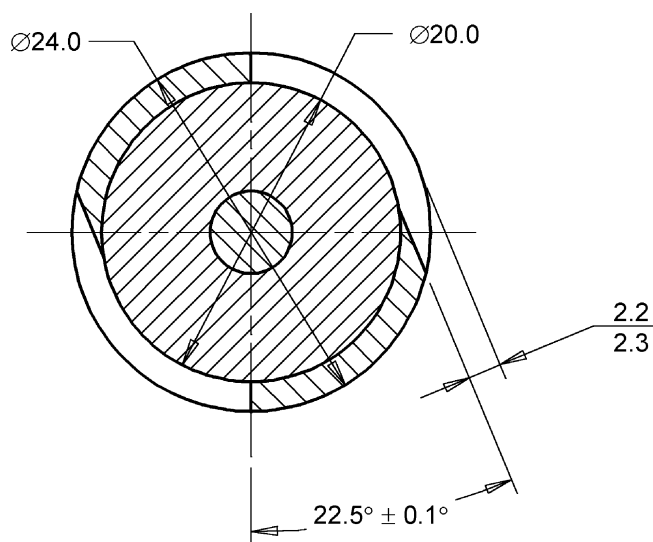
Cross section of the center section of the rotating cylinder with two steps.
